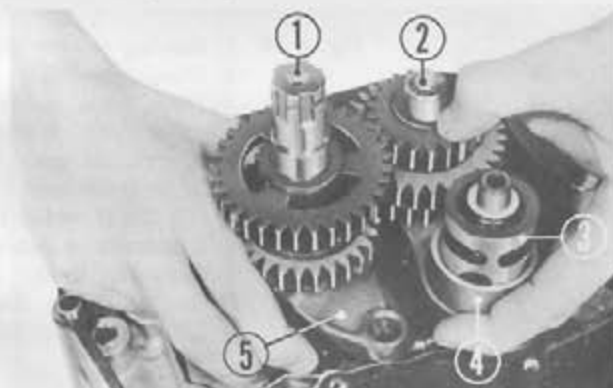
① Countershaft ④ Center gearshift fork
